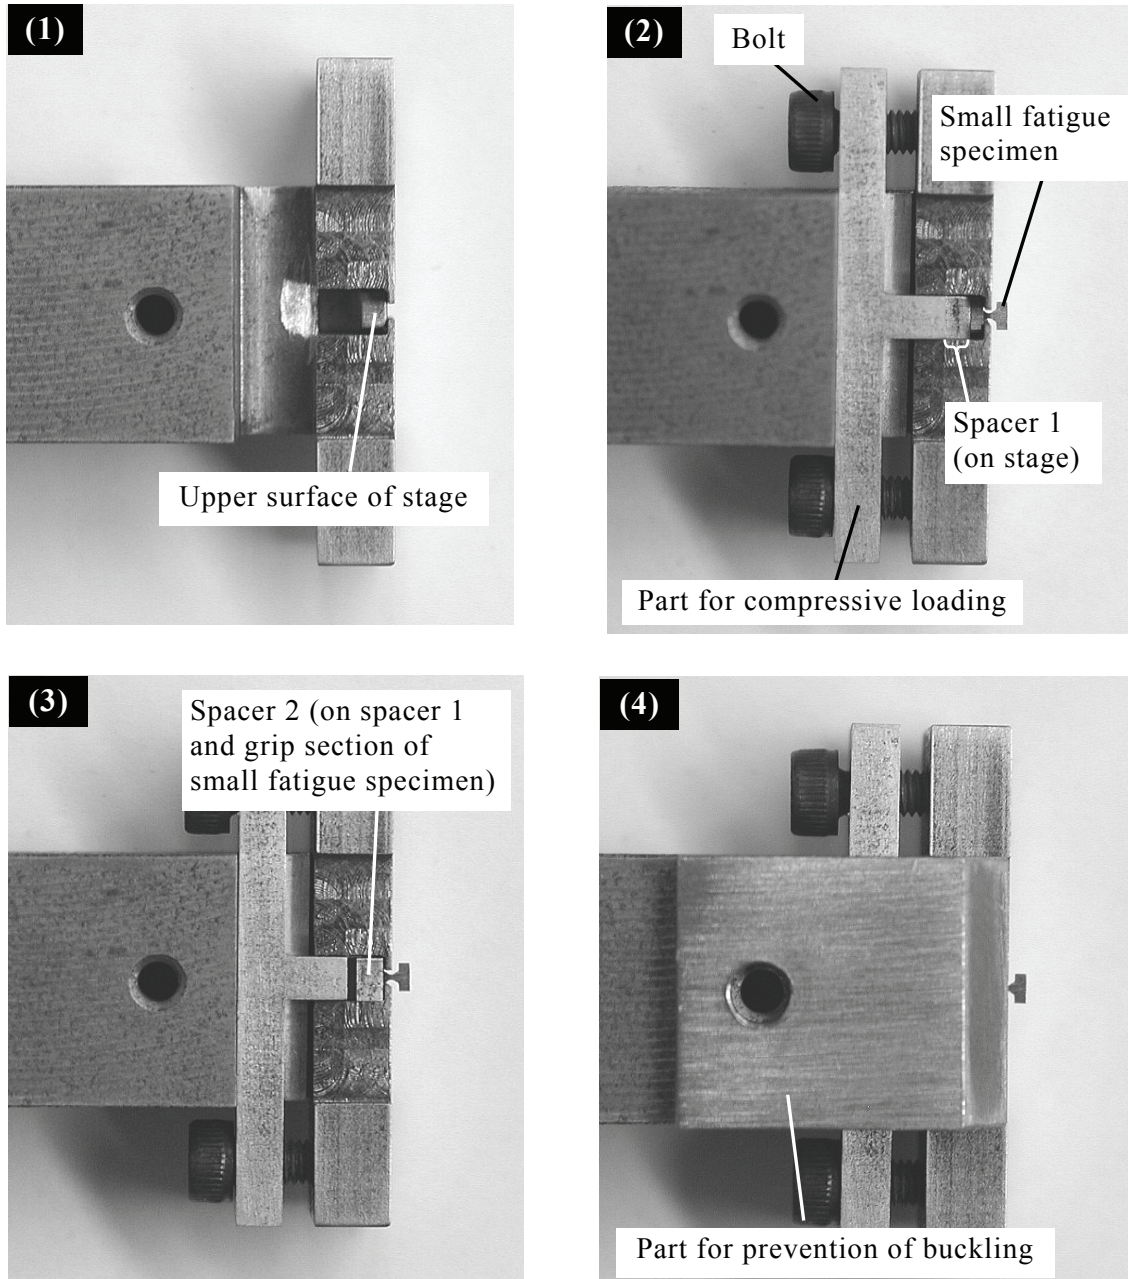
Setup procedure on testing fixtures and small fatigue specimen. (1) Attaching a stage from lower surface of fixture. (2) Fixing small fatigue specimen with spacer 1 by part for compressive loading. (3) Putting spacer 2 on small fatigue specimen and spacer 1. (4) Putting part for prevention of buckling.
